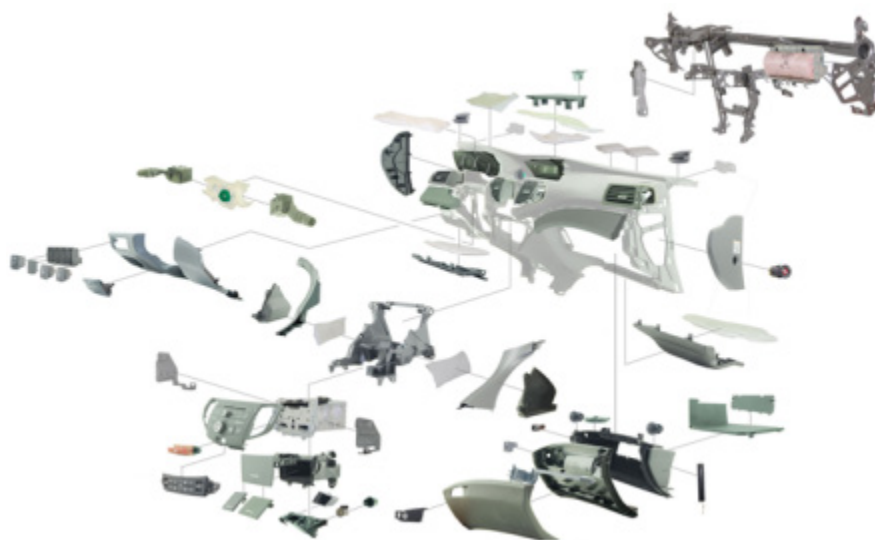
Components That Make Up the Instrument Panel Assembly²⁷
